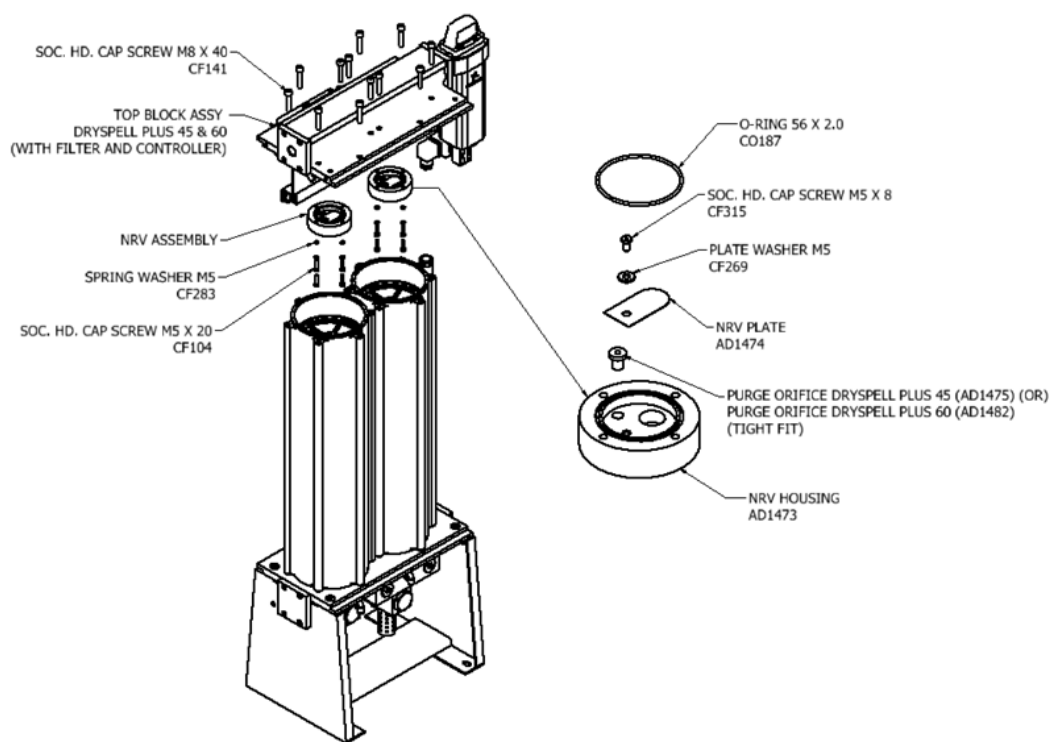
Exploded view to illustrate servicing of non-return valve plate-
